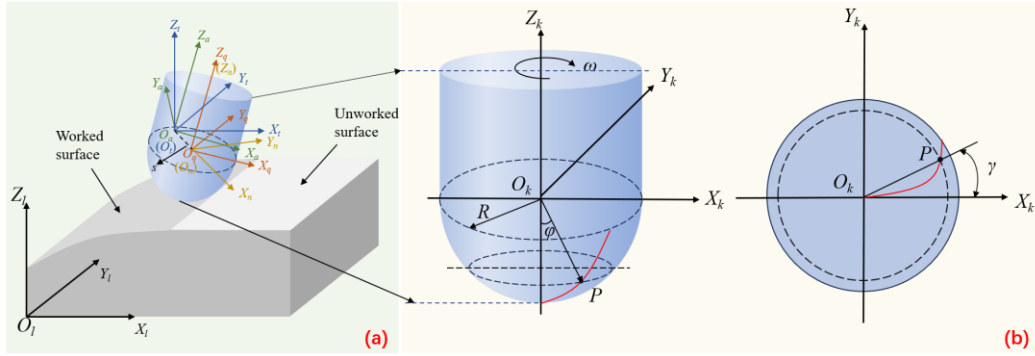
(a) Coordinate system for milling; (b) Cutting-edge geometry model of ball-end milling cutter.
